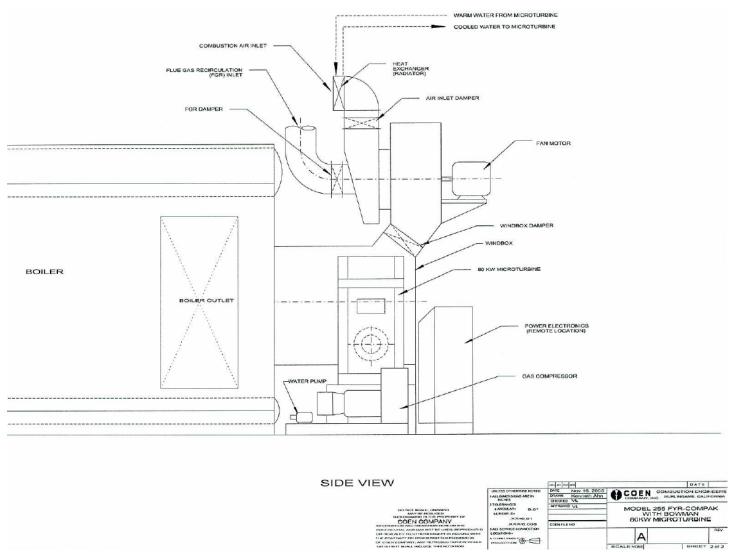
Diagram of Test Setup - Side View with Boiler and Windbox
